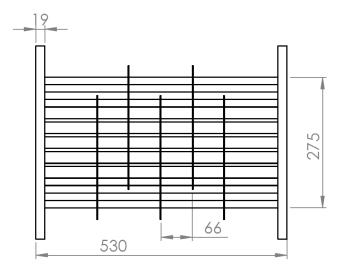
TUBE BUNDLE GEOMETRIES
